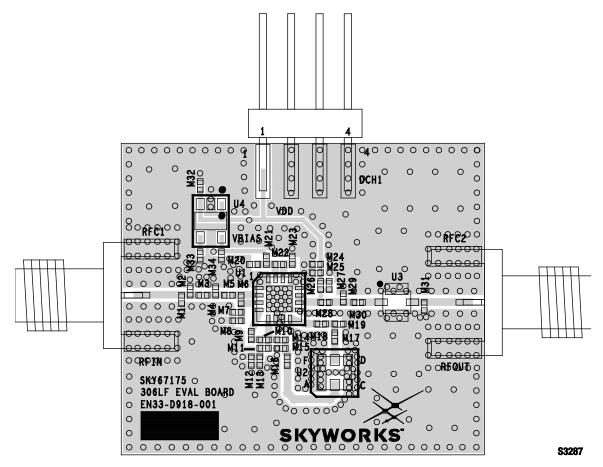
SKY67175-306LF Evaluation Board Assembly Diagram
